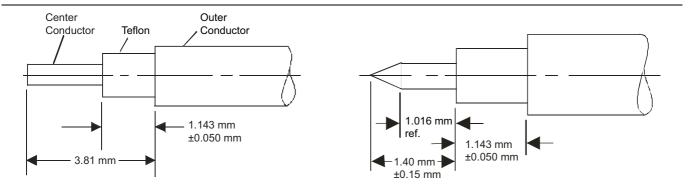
V101M-R Cable Preparation and Center Pin Assembly
